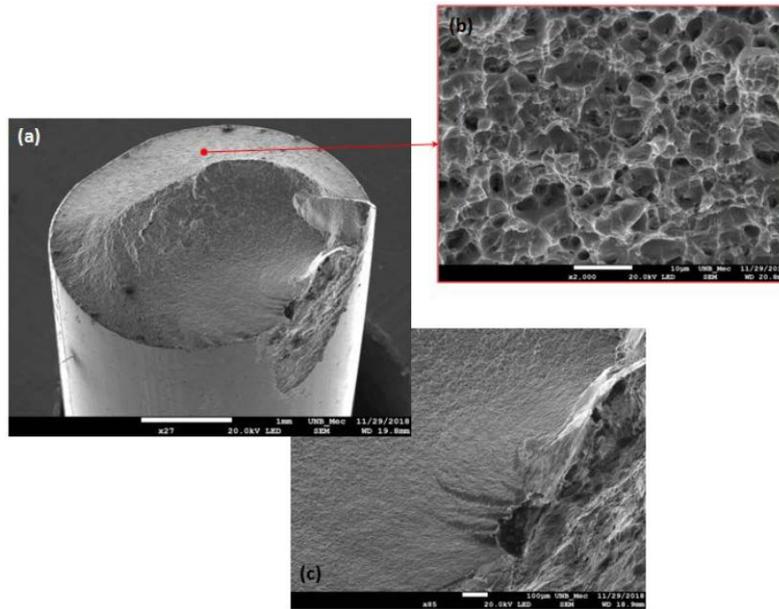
Surface of failure due to fretting fatigue (a), detail in the zone of the final ductile fracture (dimples) (b), and detail of the region of failure onset in the wire-wire contact zone (c).
